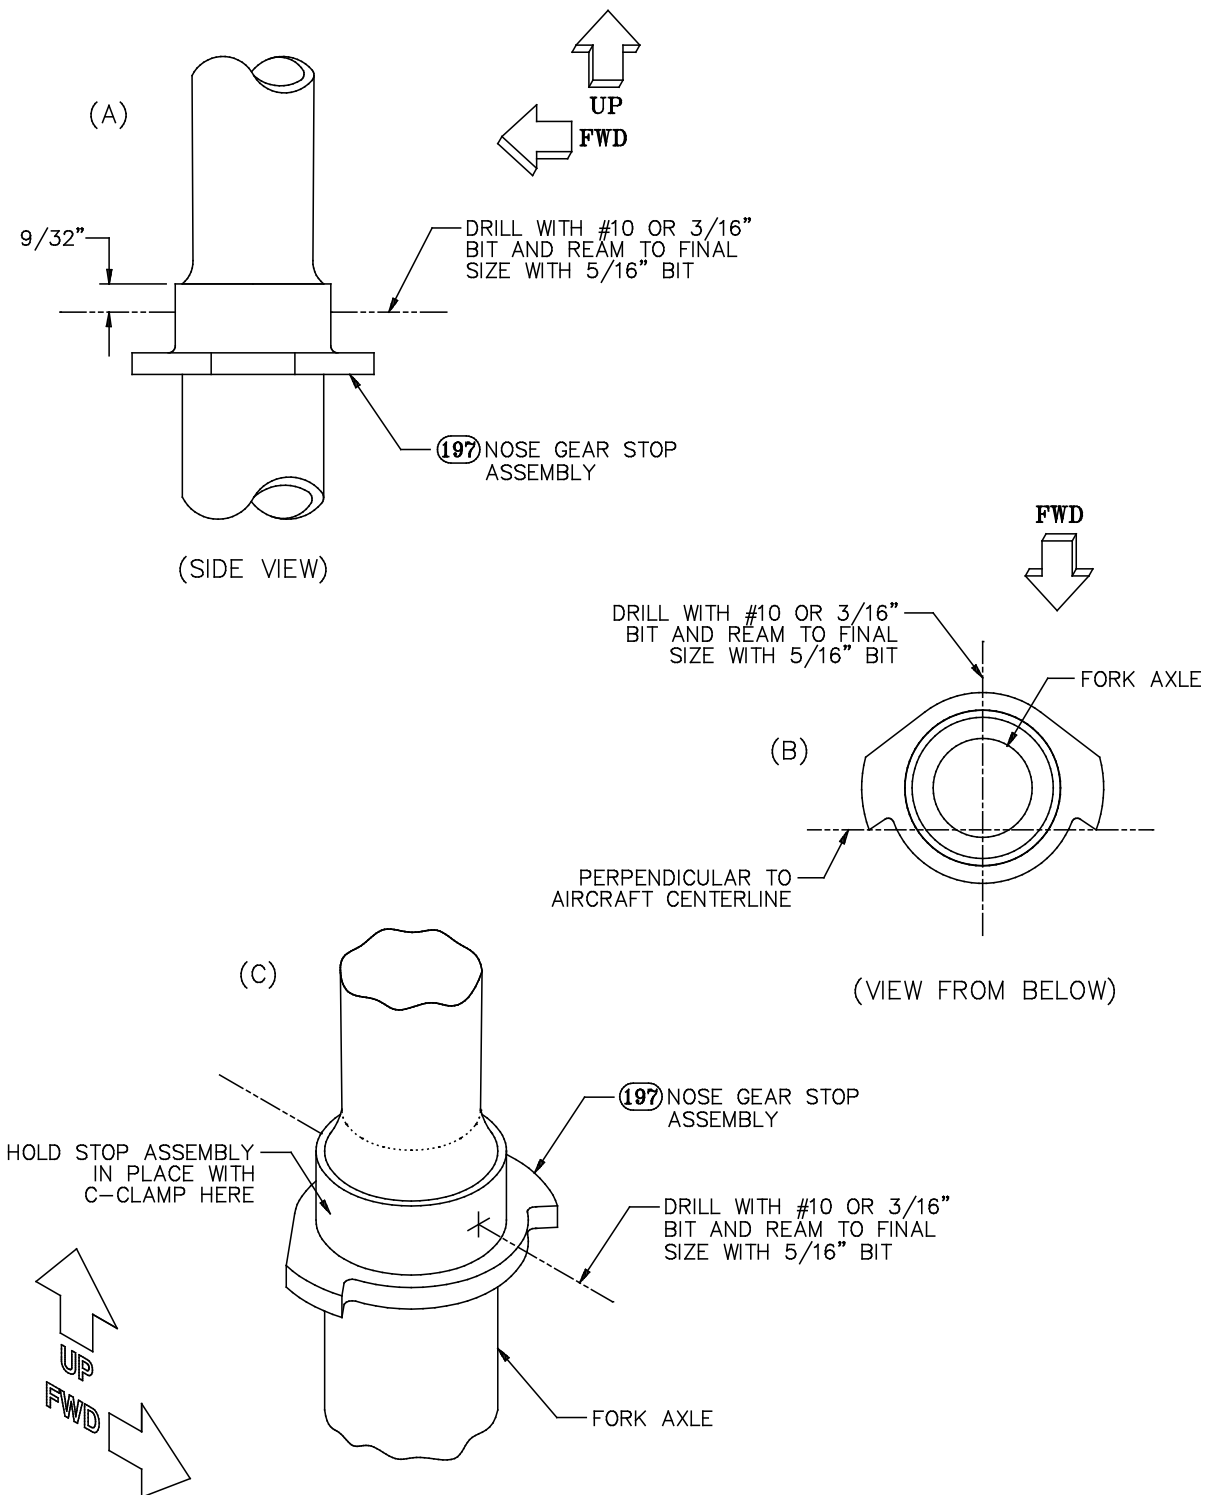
Positioning and Drilling the Nose Gear Stop Assembly
